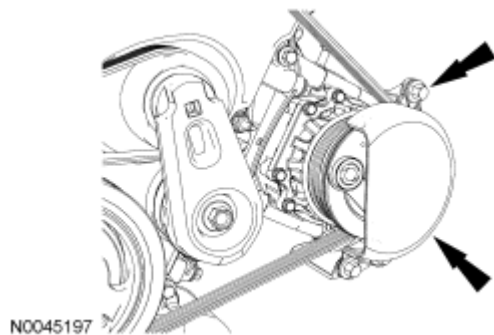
Locating A/C Compressor Pulley Shield Retainers
